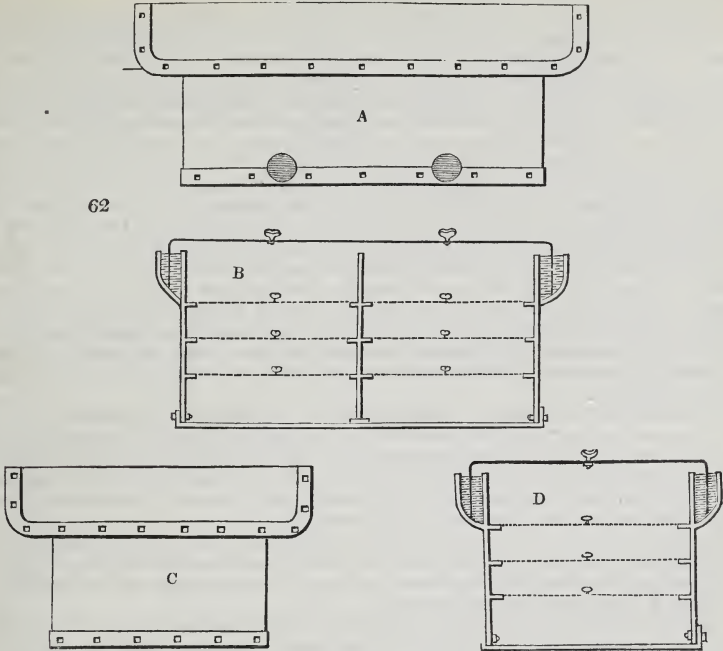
Elevations and sections of dry-lime purifiers; A, longitudinal elevation; B, ditto section; C, transverse elevation; D, ditto section.
